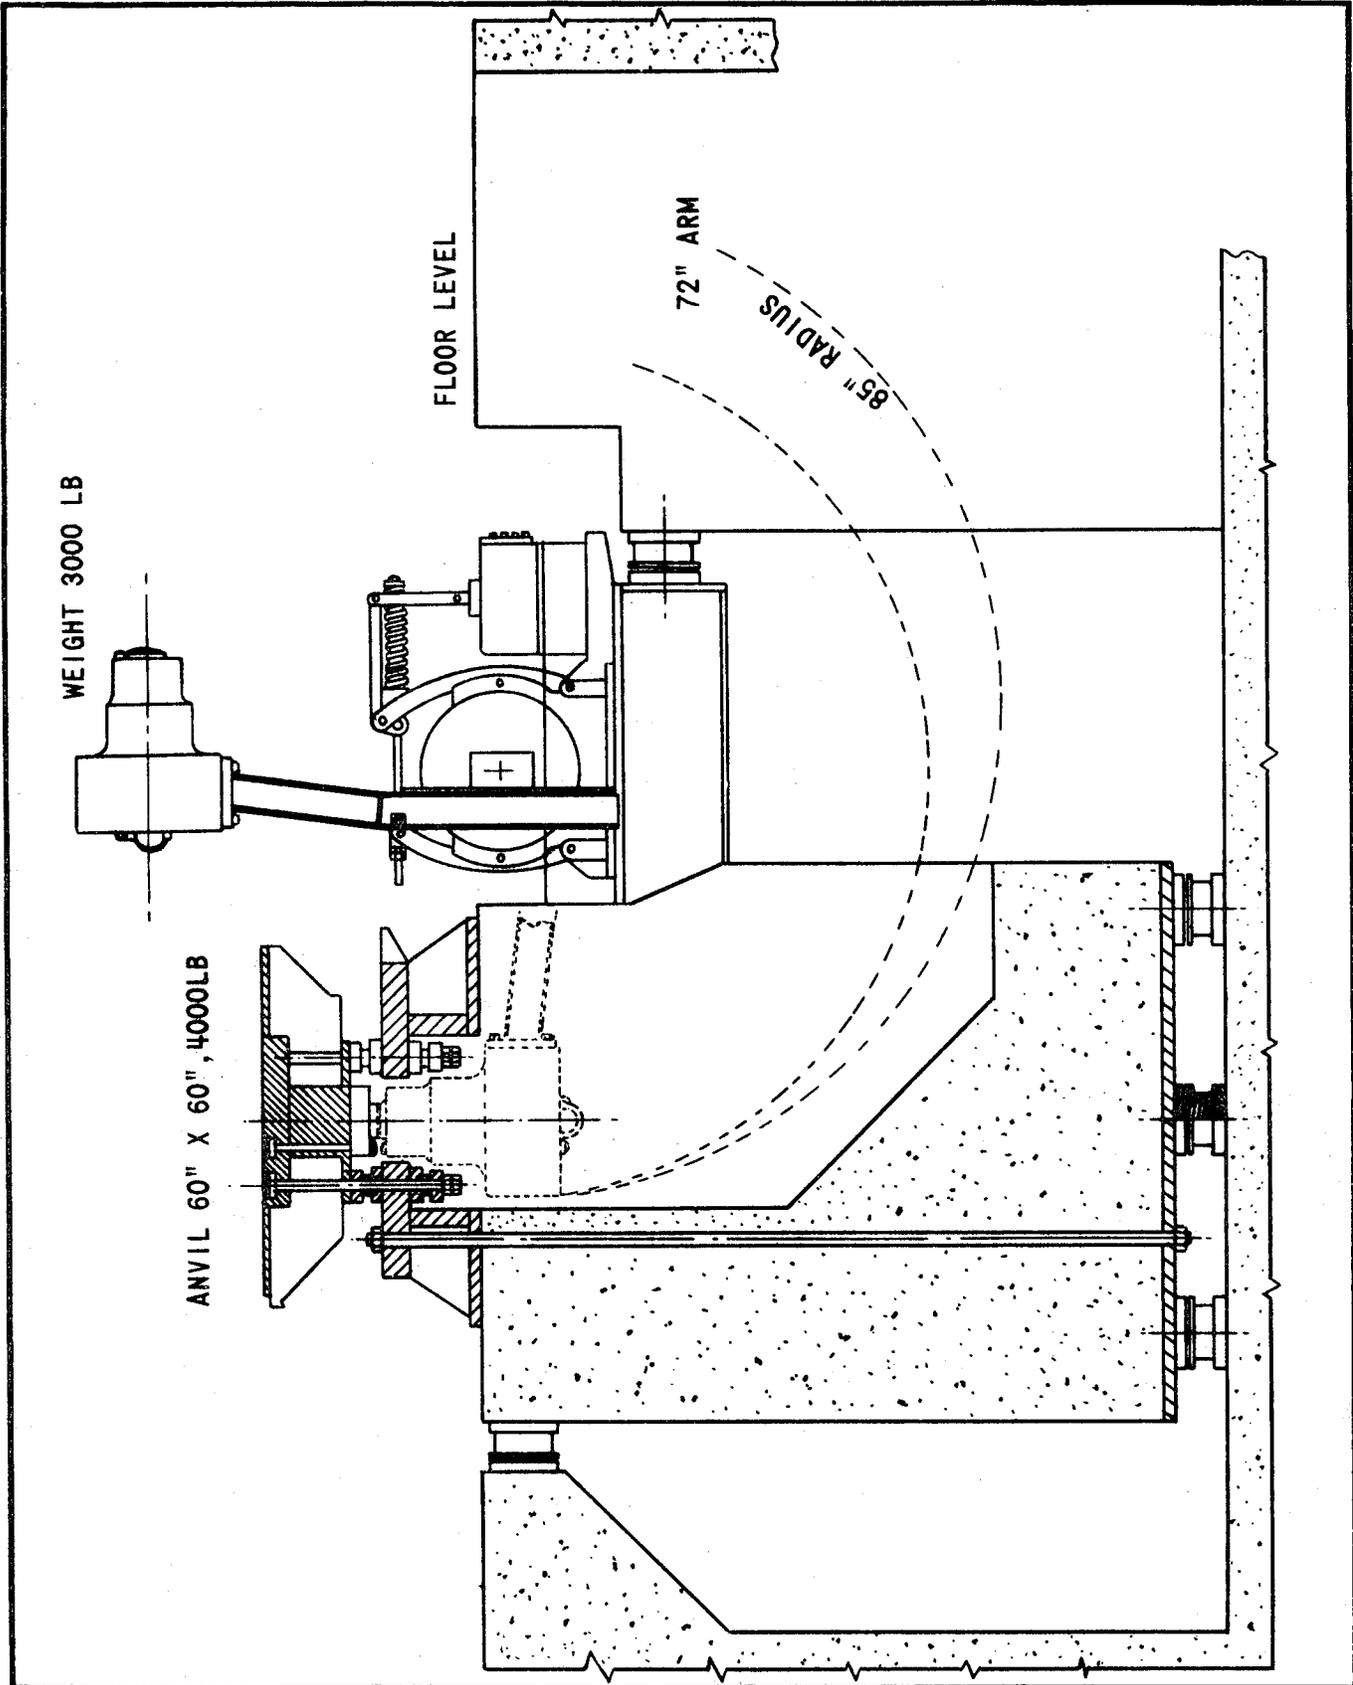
Shock Testing Machine For Medium Weight Equipment
